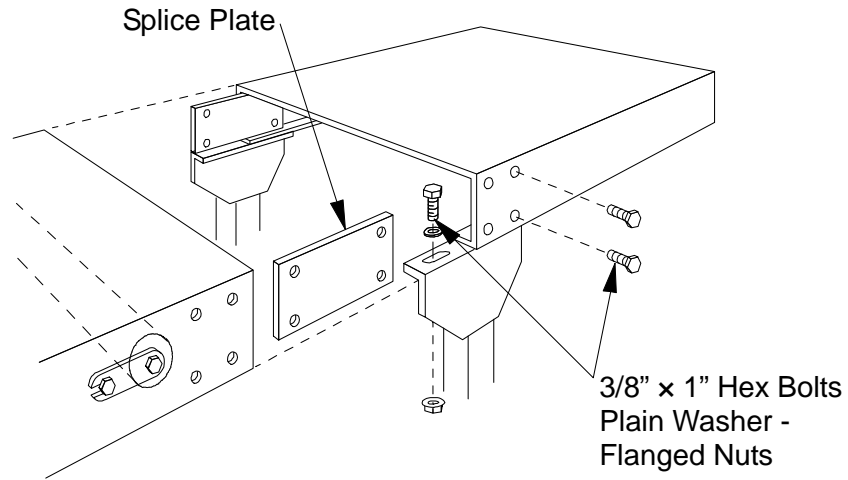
Splicing of Floor Supported Slider Bed Section
